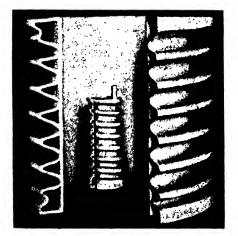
/9.—Porcelain section of a water resistor of Continental design (part cut away) for transmitters. A water coil is formed inside the hollow porcelain coil, providing a resistor and cooling anodes of high-power valves. Owing to its complicated shape, it is produced by casting.
